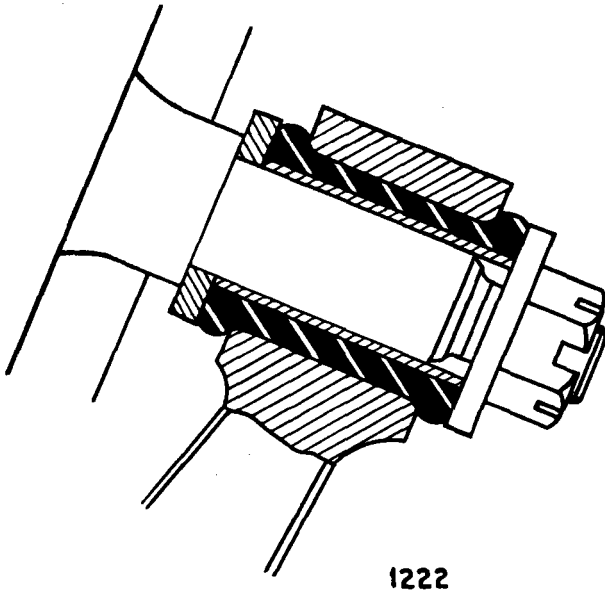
Section through one of the lower wishbone rubber/steel mounting bushes.
